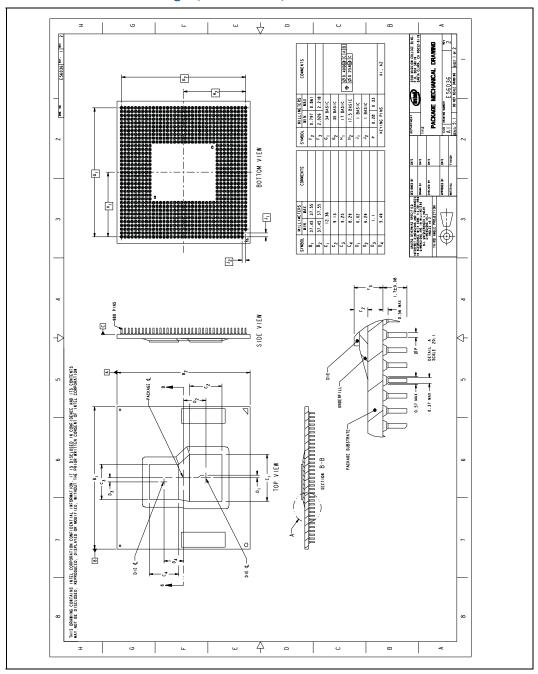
rPGA Mechanical Package (Sheet 2 of 2)
